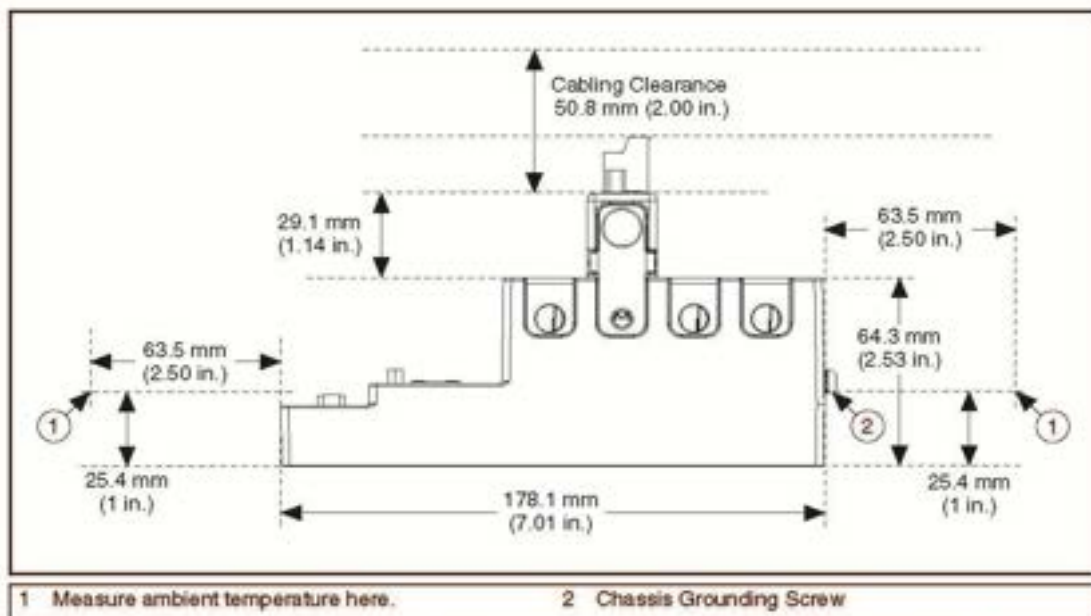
cRIO-9075/9076, Bottom View with Dimensions
